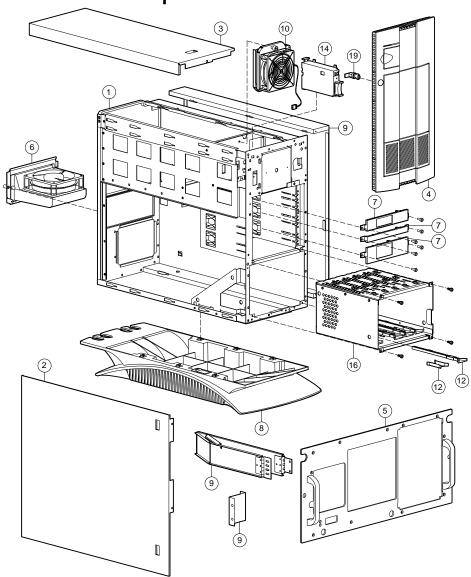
Exploded View of the Compaq ProLiant 2500 and 2500R Server Mechanical Parts
